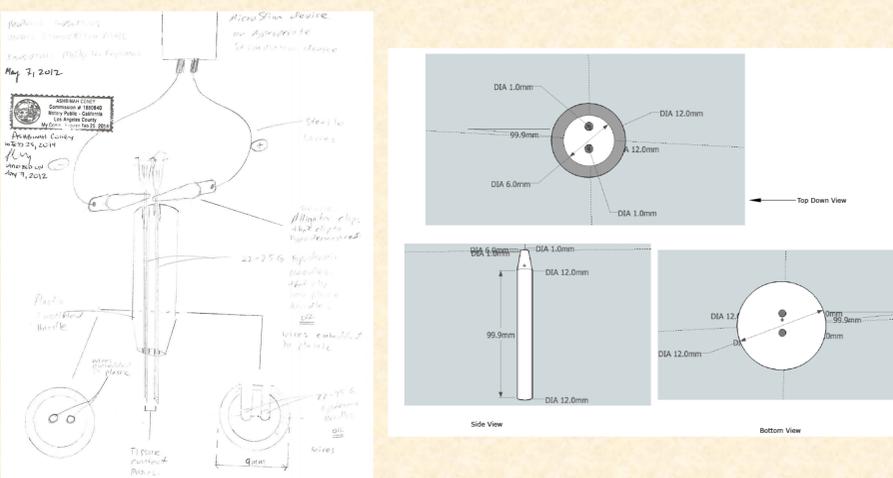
A, Initial probe concept drawings. B, 3D probe design.
